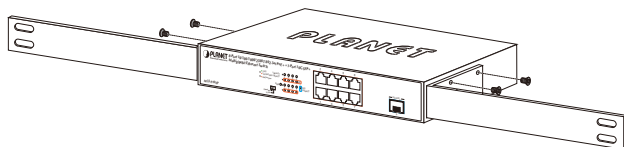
Attaching the brackets to the Multigigabit Ethernet Switch
